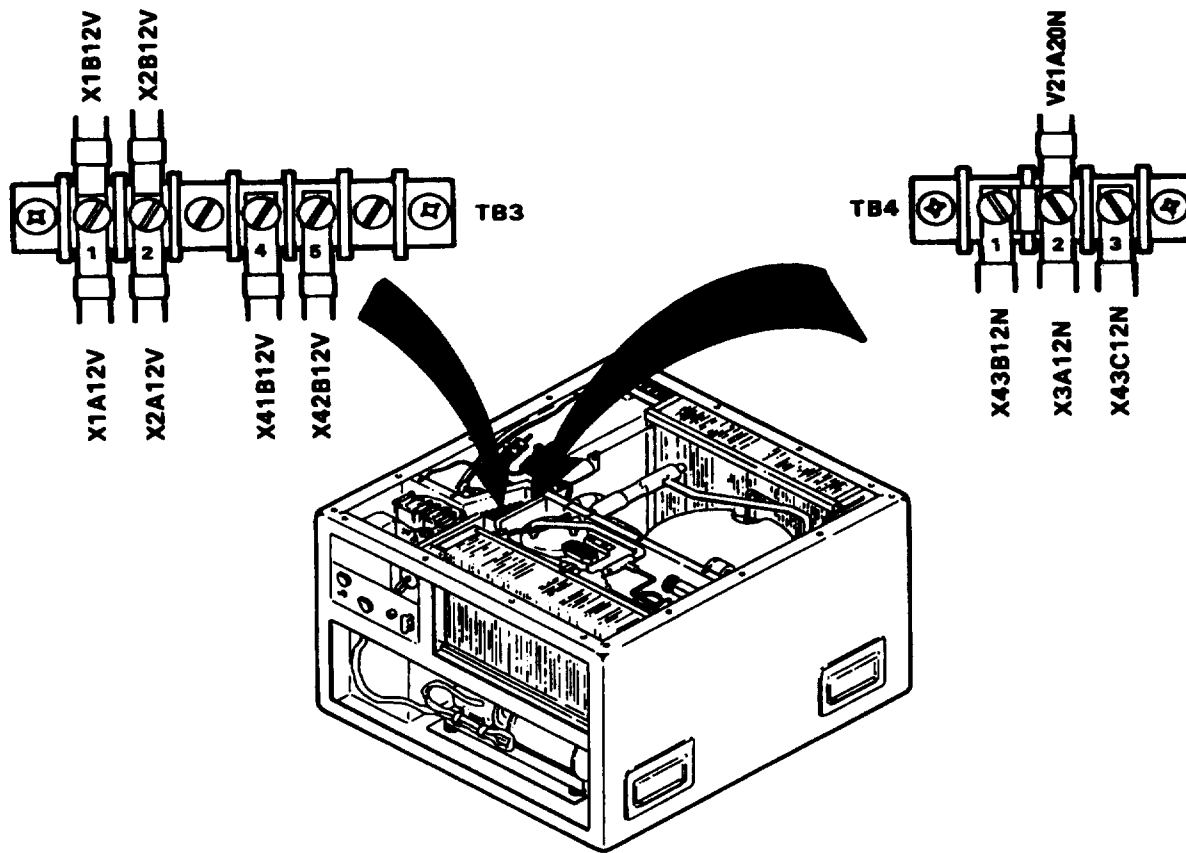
Connector J1 Wired at Terminal Board TB3 (Single Phase)
